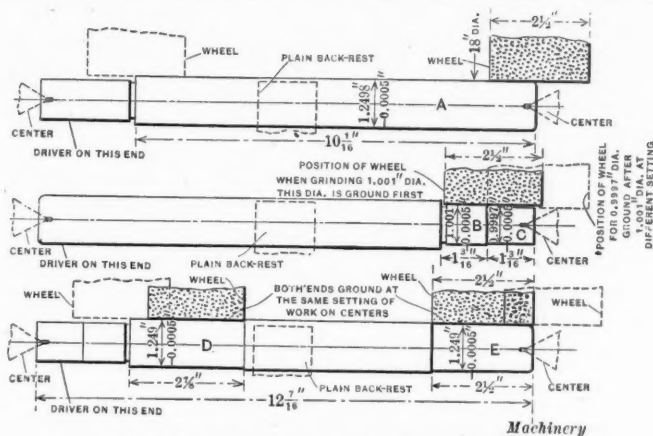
Fork Shaft for Milling Machine, illustrating a Good Example of the "Fixed-wheel" Method of Grinding
